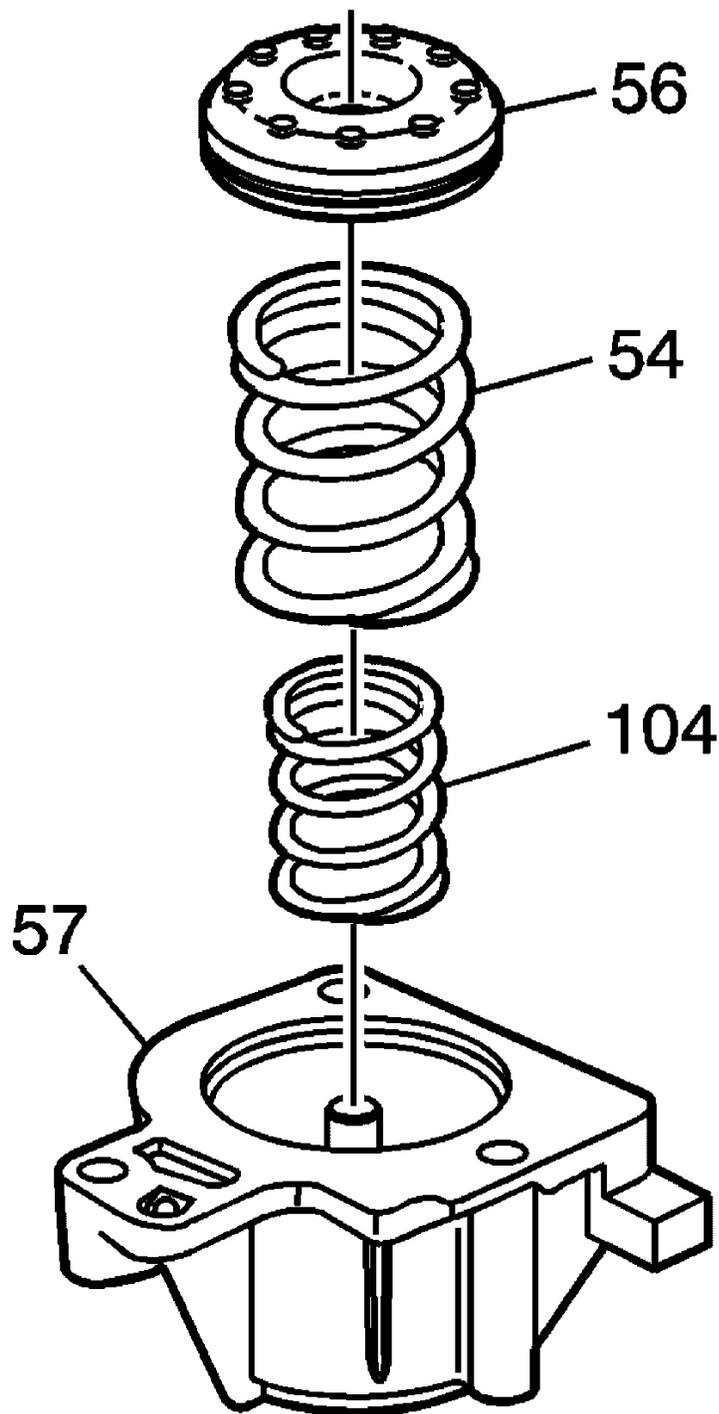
Installing 1-2 Inner & Outer Accumulator Springs & 1-2 Accumulator Piston
